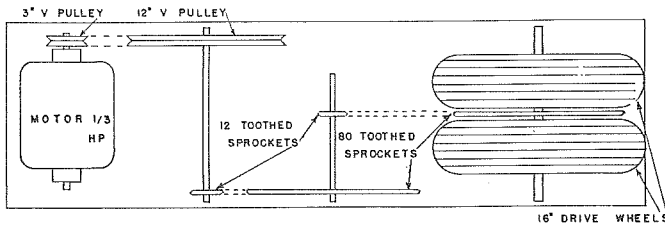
Alternate drive, using two jack shafts and no reduction gear. The materials are not listed in the bill of materials.
